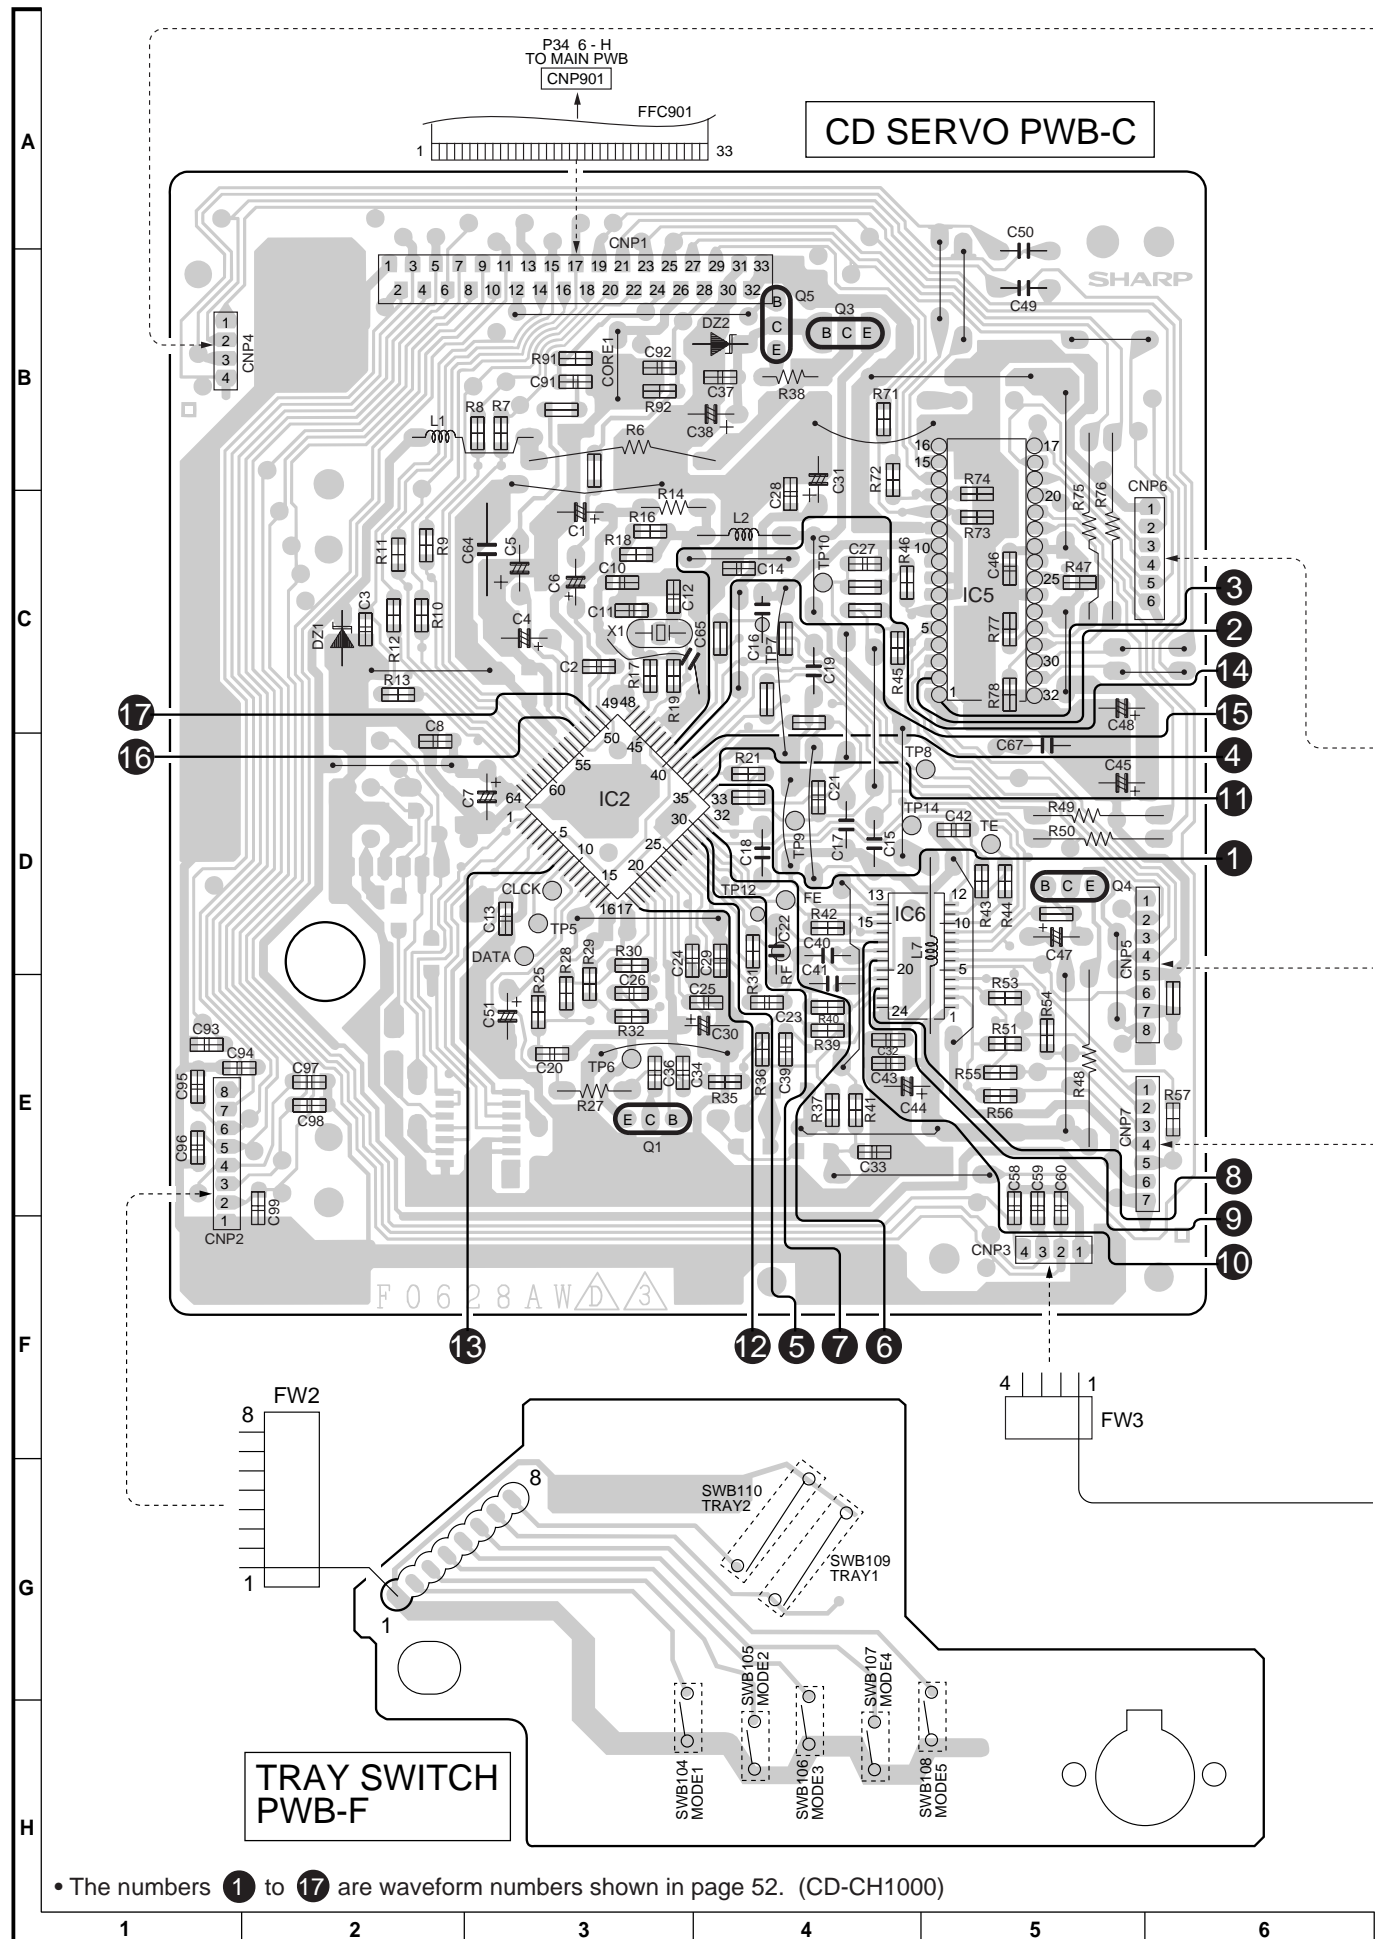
WIRING SIDE OF P.W.BOARD (6/9)
